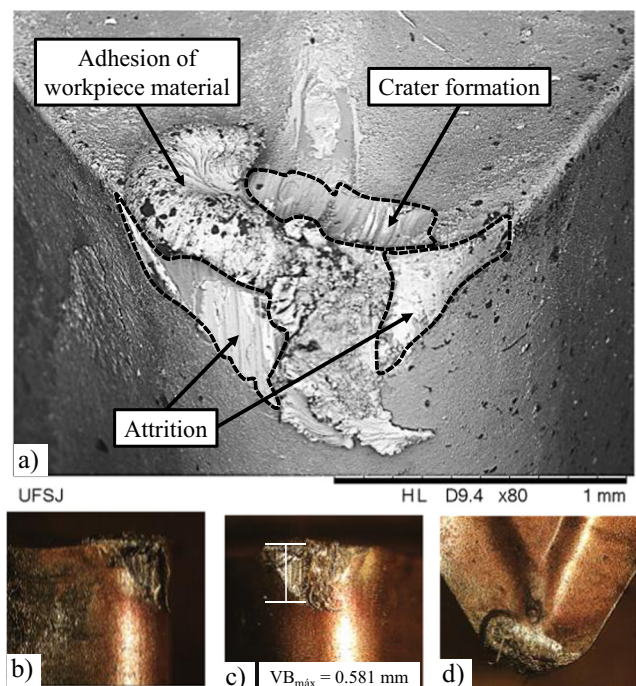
Cutting tool with $VB_{\max} = 0.581$ mm used in turning with the cold air system, with cutting speed of 400 m/min. a SEM. b Clearance surface. c Tip. d Rake surface
